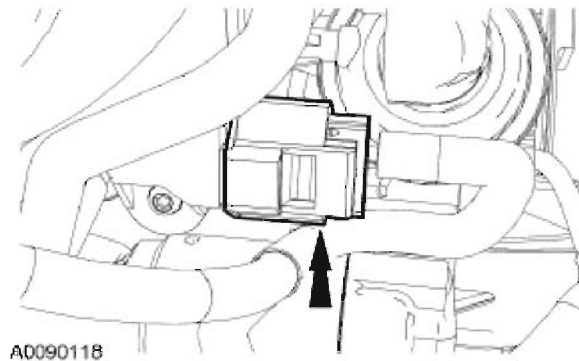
Locating Swirl Control Valve Electrical Connector
